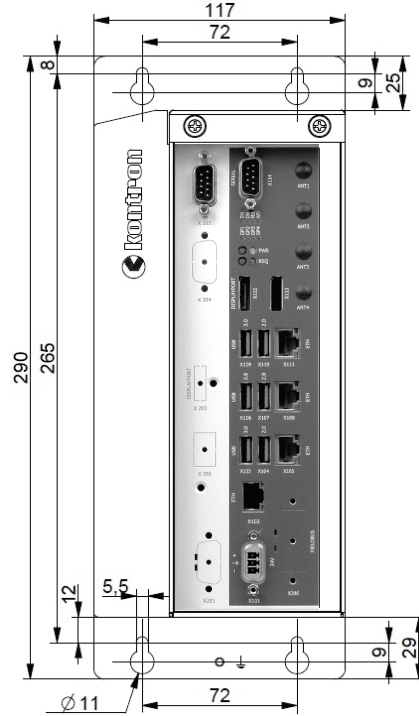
Dimensions: detail key hole (KBox C-104-TGL-0)
